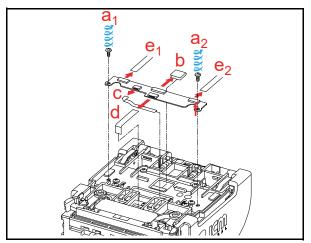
Sensor Transfer Board Assembly, CIS FFC, Transmissive Light & Upper UV FPC Cable Removal
